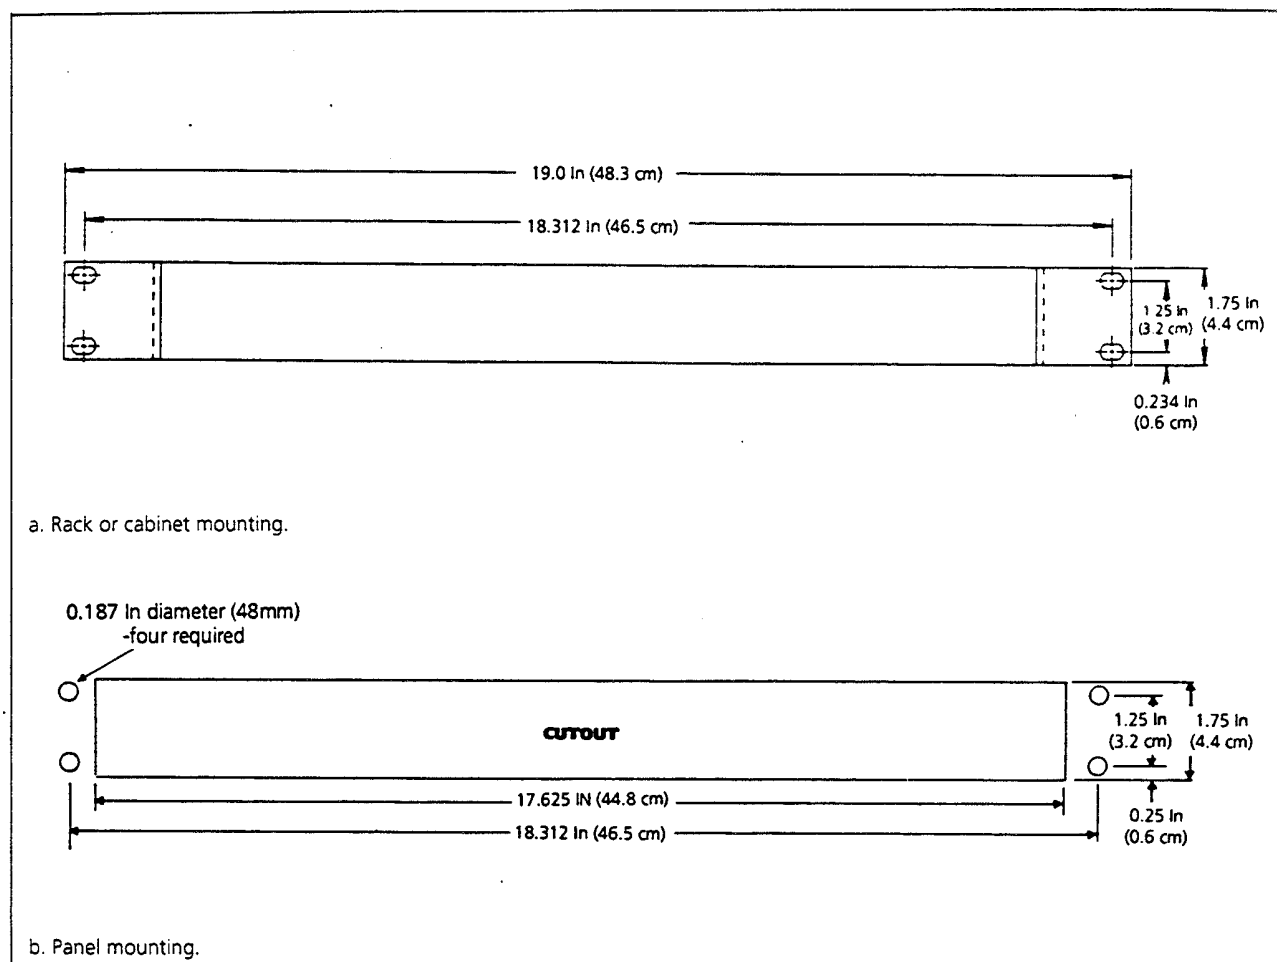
Mounting dimensions, 1U chassis for RFL 9720 Digital Pilot Wire Interface
